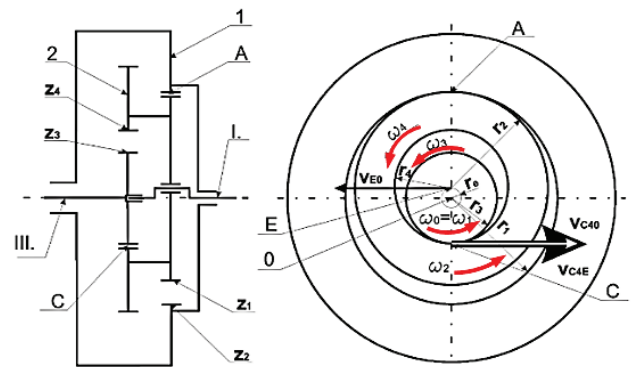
Restricted view on the gear ratios between the input shaft I. and the output shaft III. [15]
